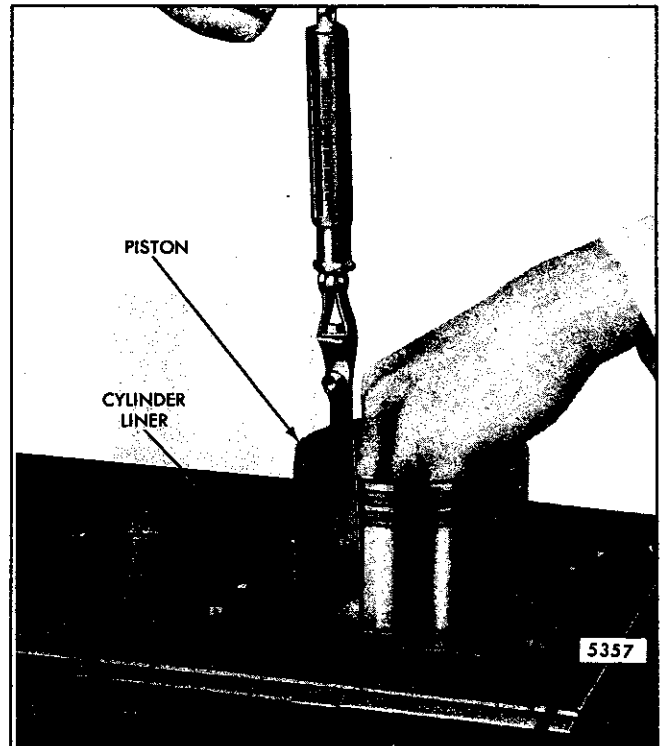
Measuring Piston-to-Liner Clearance with Tool J 5438-01
